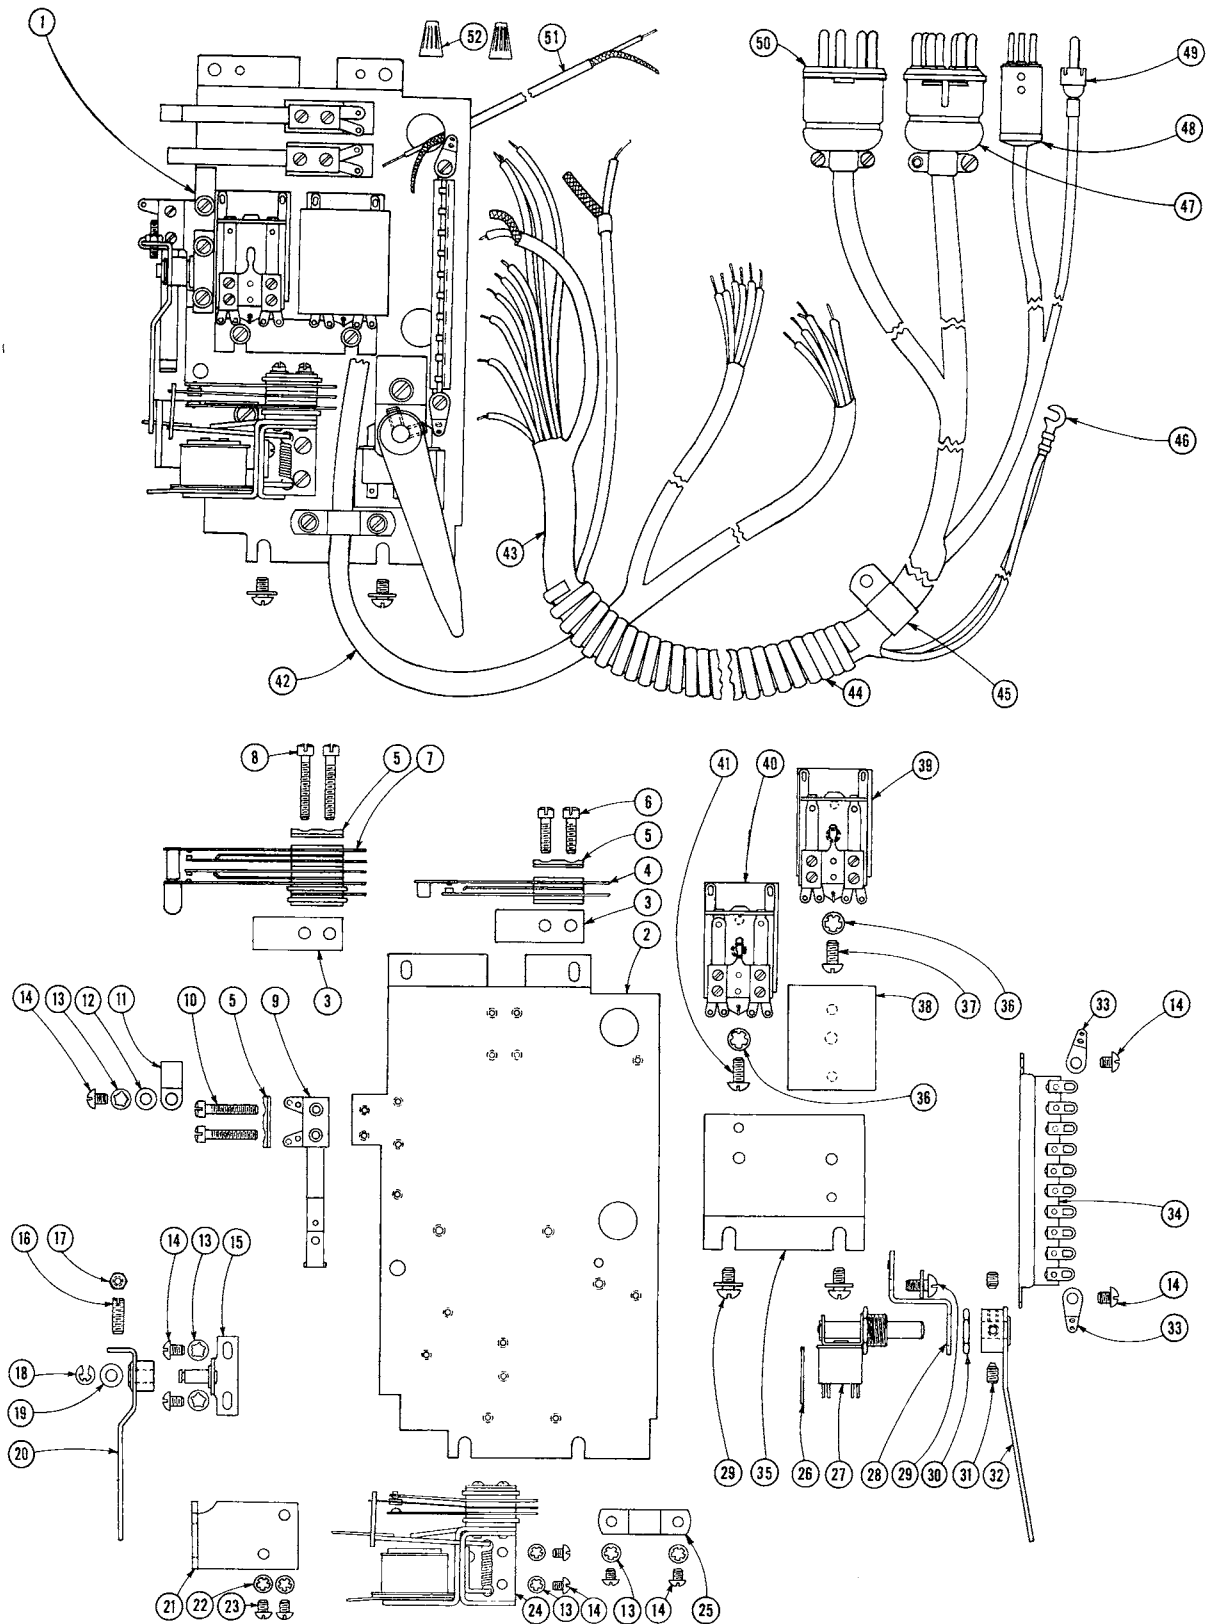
SWITCH PLATE & CABLE ASSEMBLY
